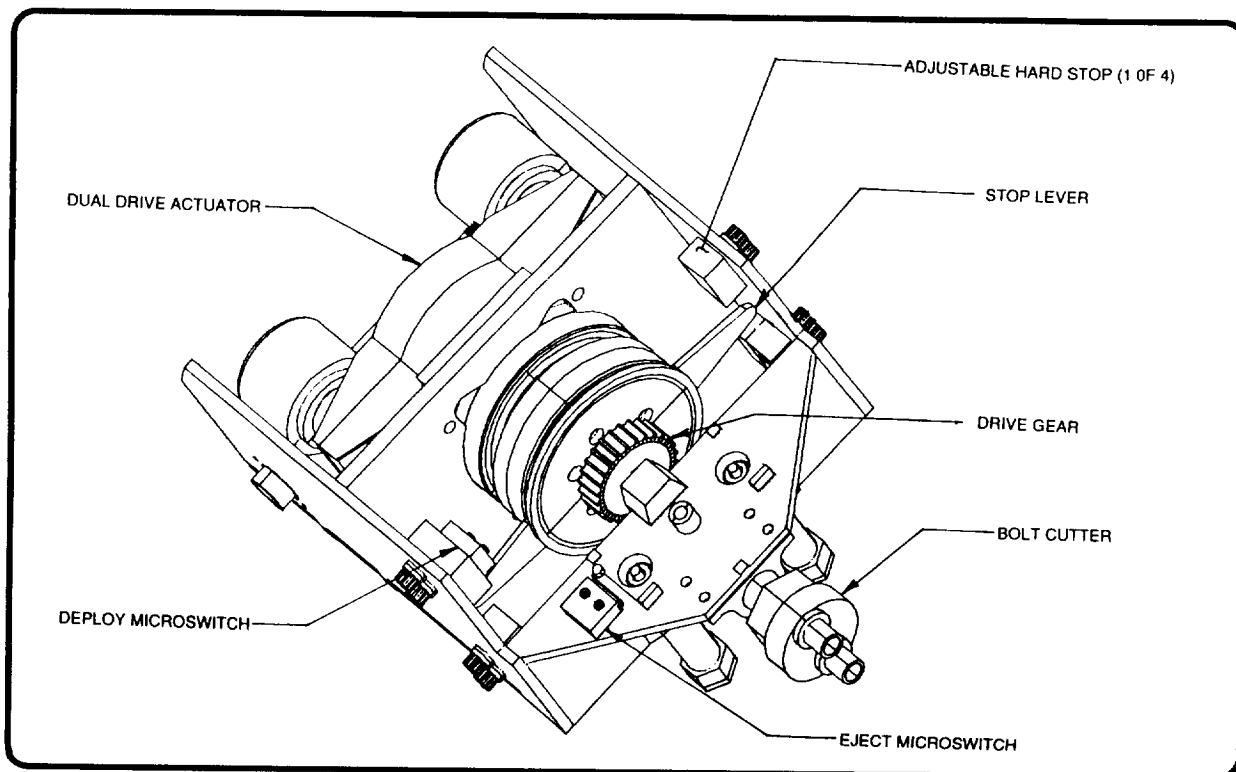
VIEW OF DRIVE MECHANISM SHOWING STOP LEVER
